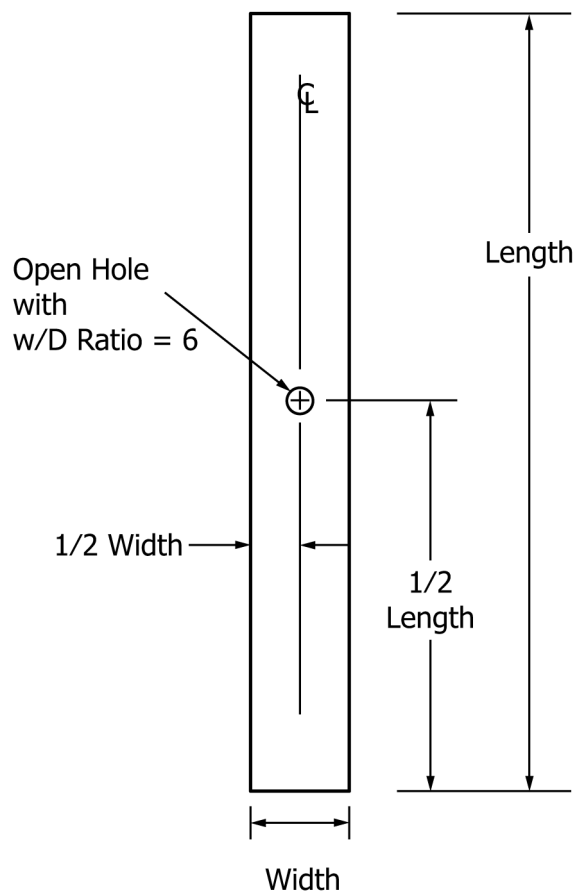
Schematic of Open-Hole Tension Test Specimen
